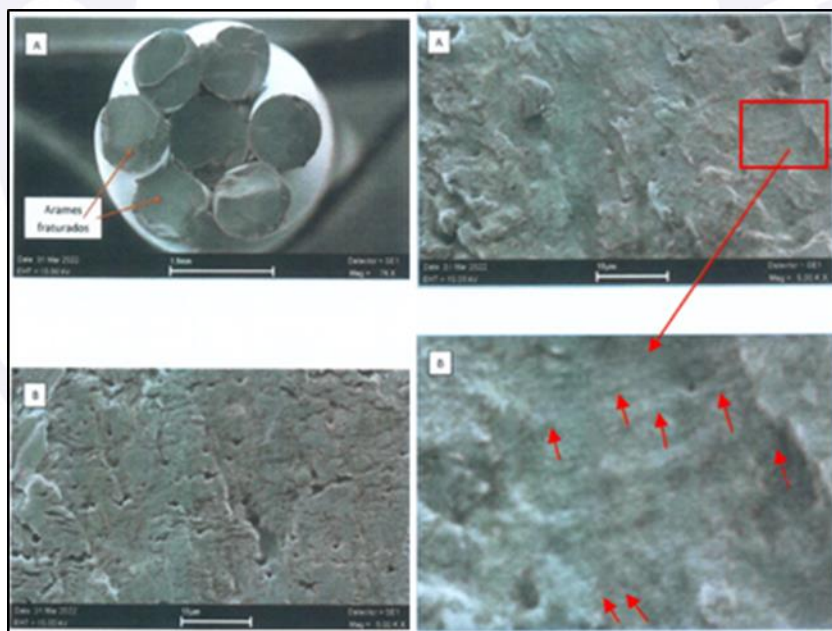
Highlight of the fatigue mechanism on the fractured wire (red arrows).
